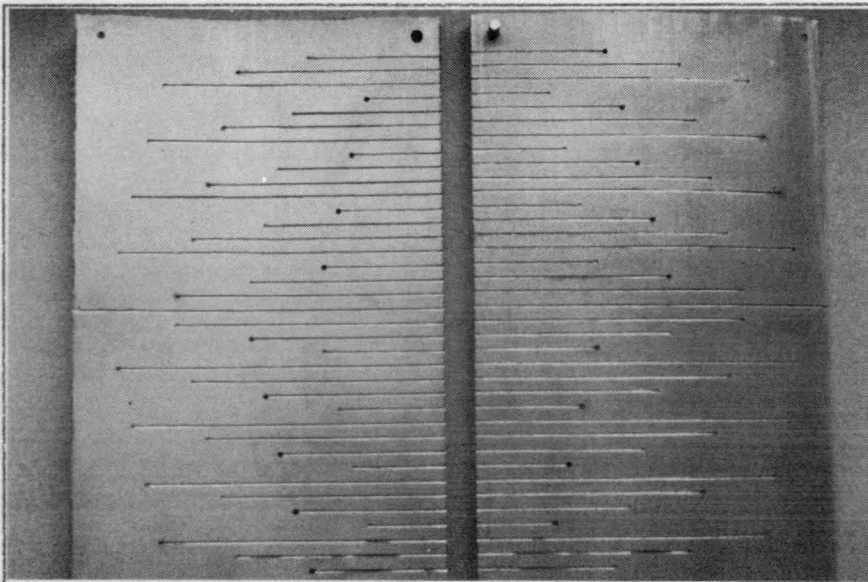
Samples DS2B(left) and A(right) after chemically milling channels & drilling holes
